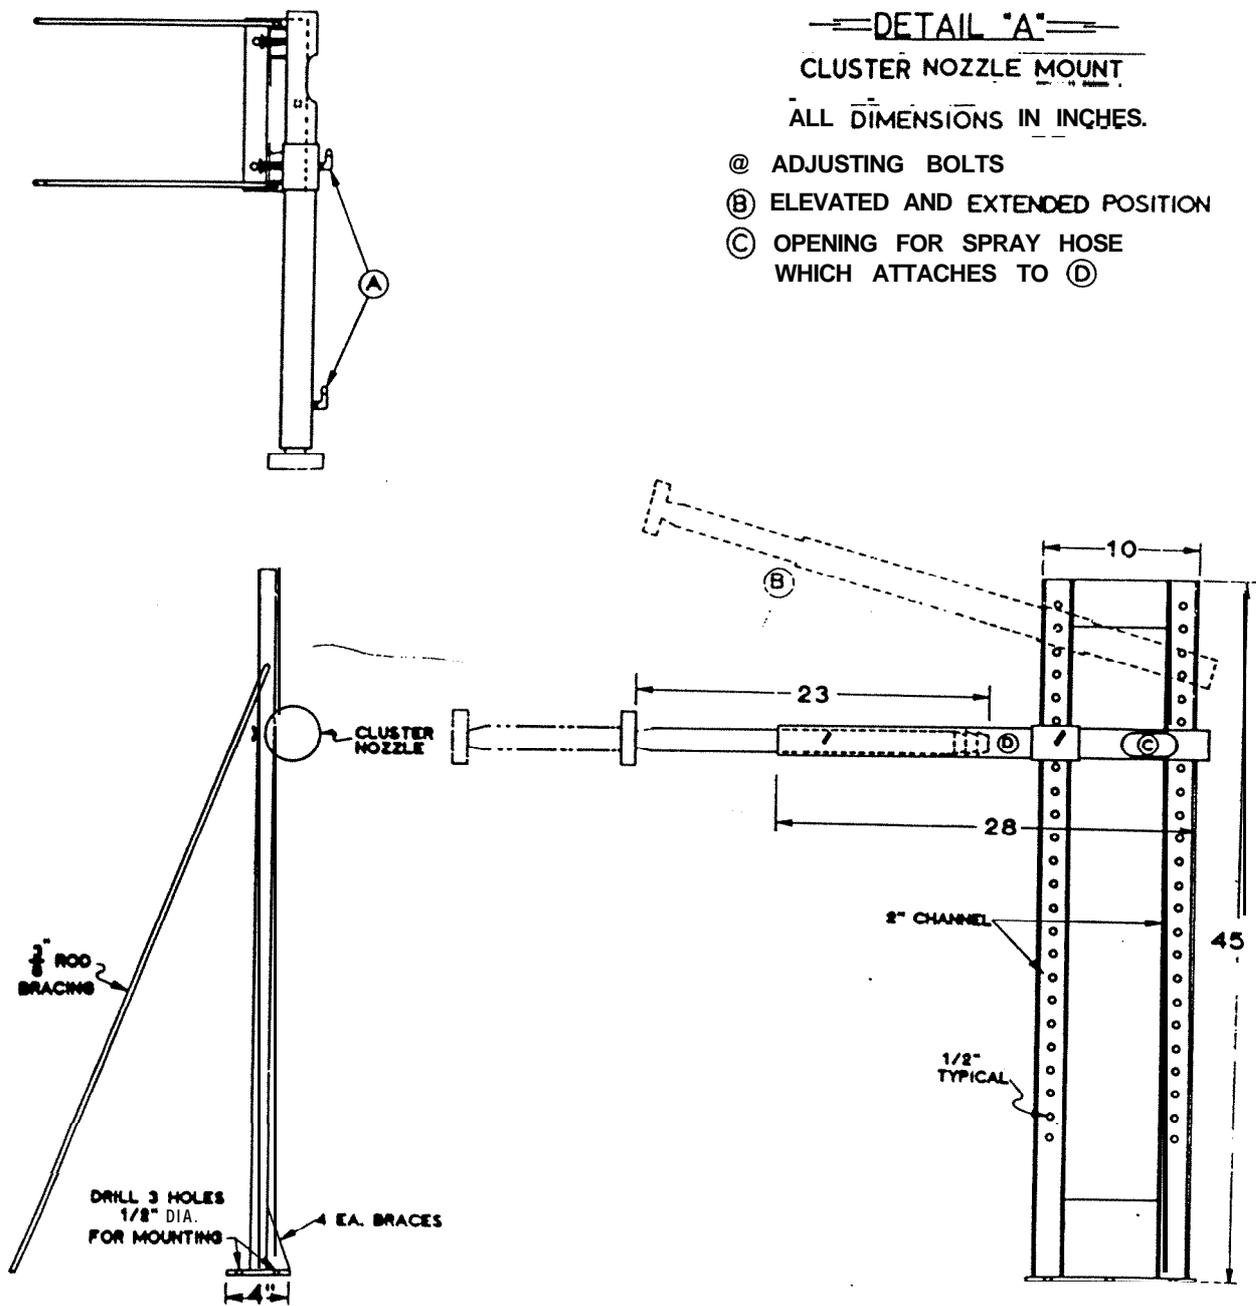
Adjustable mounting assembly for a cluster nozzle.
